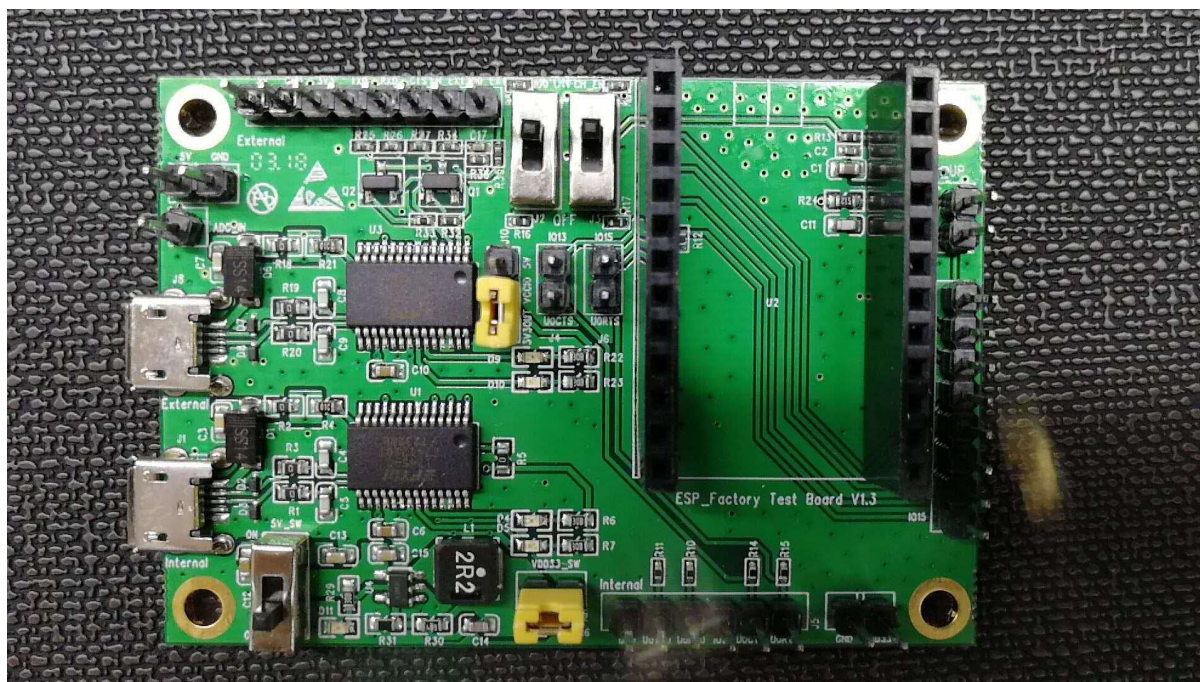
A Typical Serial Port Board (ESP_Factory Test Board V1.3)
